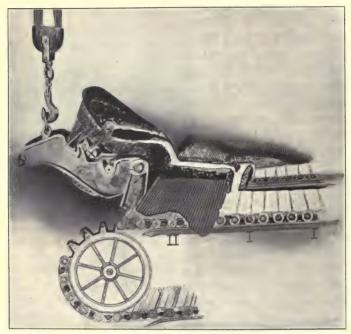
Casting Machine, showing Metal Running from Ladle into Molds carried on an Endless Chain.
